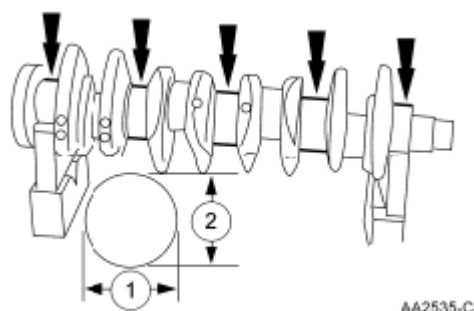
Identifying Measuring Directions Of Crankshaft Main Bearing Journal Diameter
